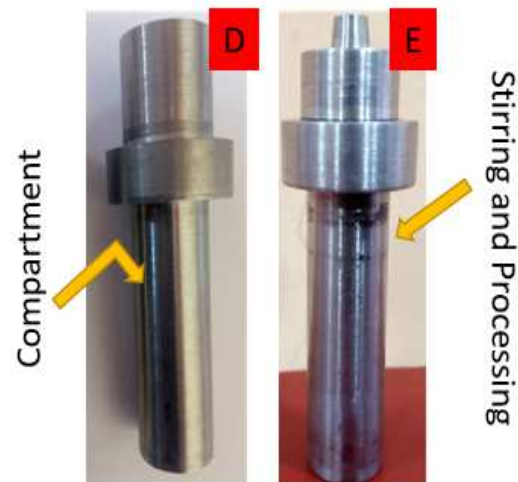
(d) &amp; (e): Pinless Tool &amp; Tool with Pin
